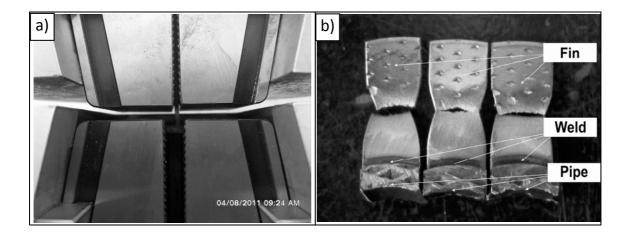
Results of trials are static tension-rib pipe connections: a) position in grip of testing machine, b) specimen after testing
